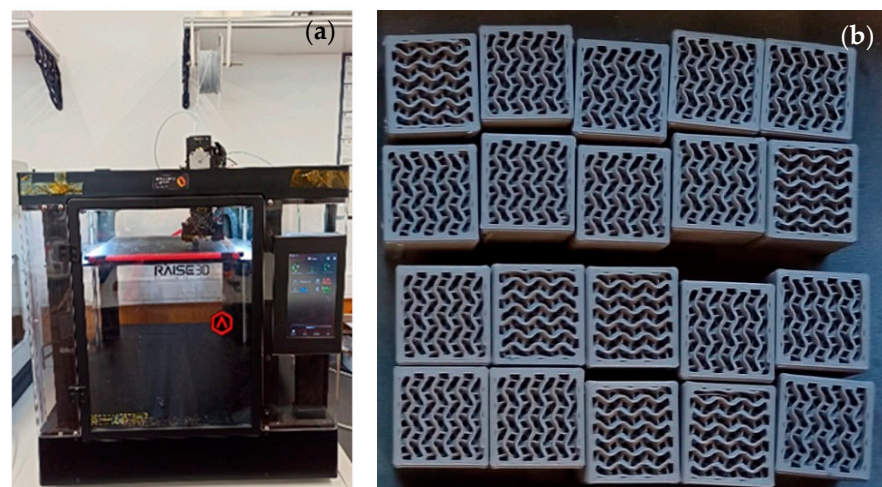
Raise3D Pro2 3D printer (a) and green parts after debinding (b).
